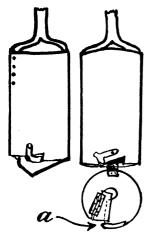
A clay and sand auger that can be made locally. Augers of similar design are sold by many manufacturers without the flap valve a. R. R. Howell & Co., Minneapolis, manufacture these augers. A hinge on the shaft is not needed because the bottom of the auger swings back on a hinge to empty the contents.
